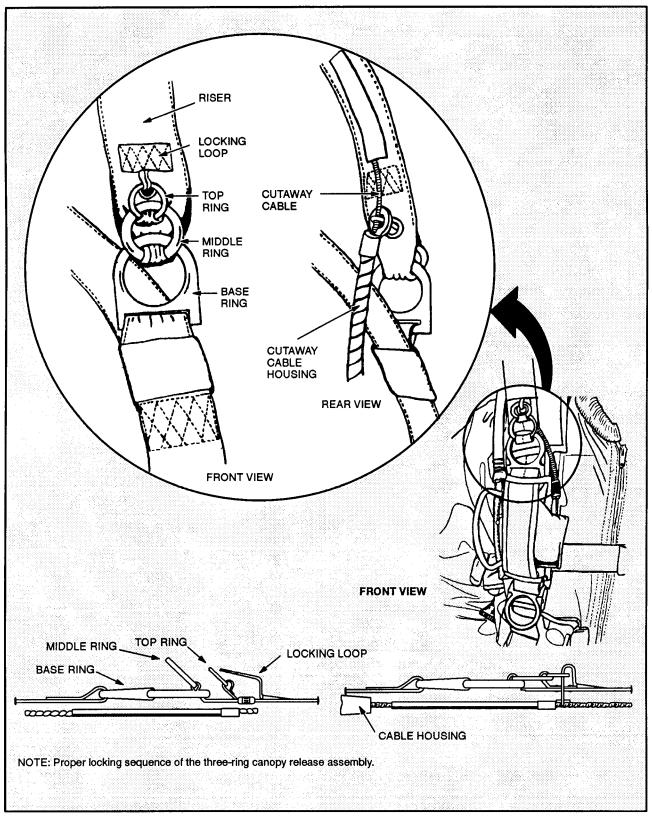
Location and locking sequence of the three-ring canopy release assembly.
